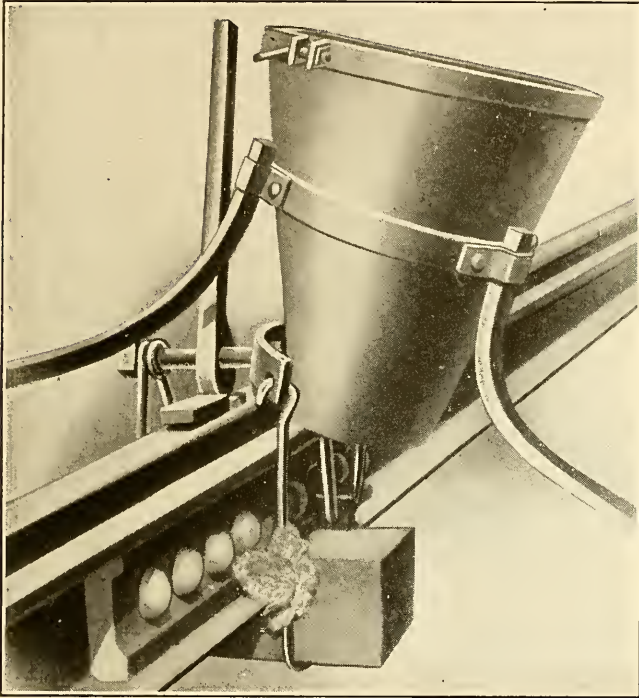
Open Mold and Crucible in Position for Making Clark Joint.
